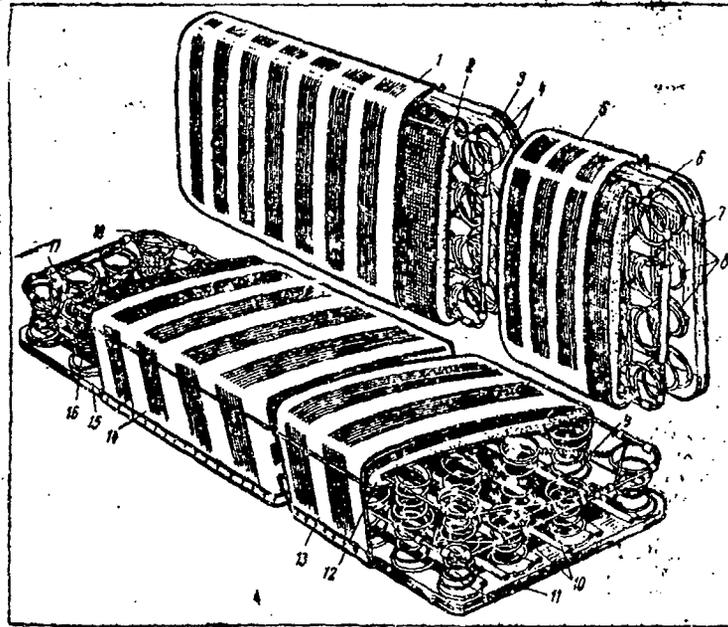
Seat of ZIL-157K: 1 and 5, passenger and driver seat backs; 2, 6, 12 and 16, padding; 3, 7, 11 and 15, wooden frames of seat and back; 4, 8 and 17, springs; 9, tension springs; 13 and 14, passenger and driver seats; 18, edge wire
